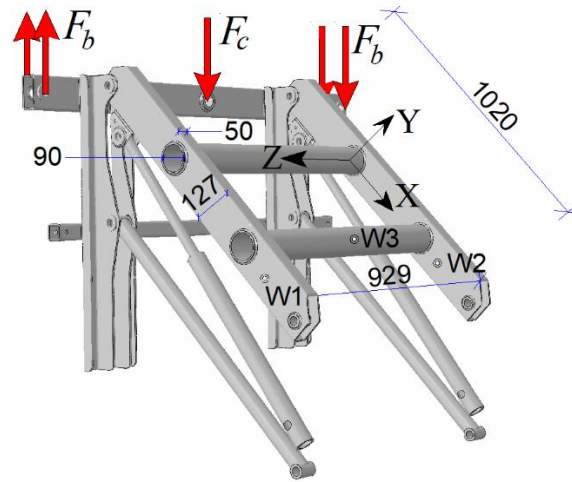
H component: geometrical sizes (in mm), loading condition and control points.
